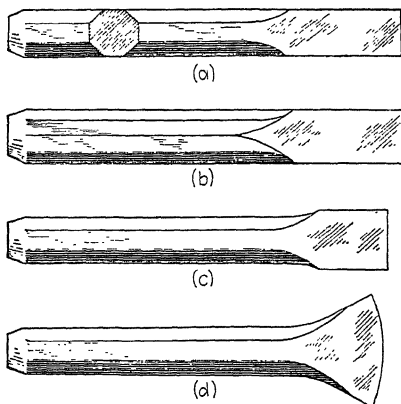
Forging a flat cold chisel. *a*, Right. *b*, Wrong, not forged parallel with flat of stock. *c*, Right, edges kept parallel and about the right width. *d*, Wrong, forged fan shape.
